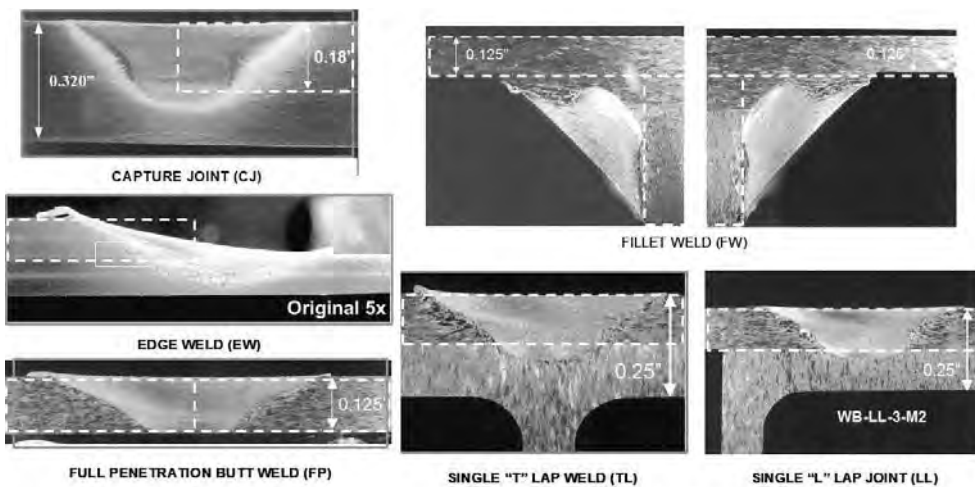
Typical Friction Stir Weld Joints in Aluminum
